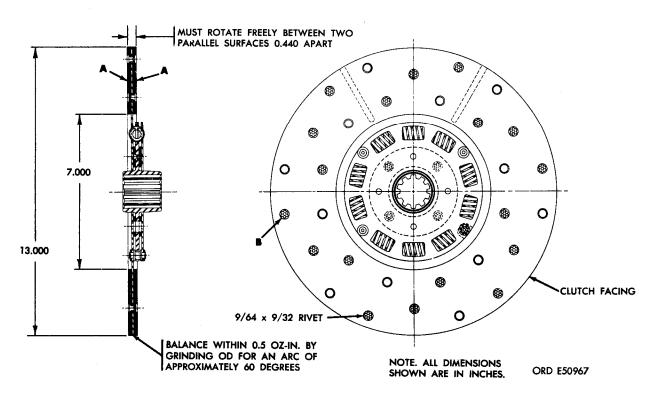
INSTALLING NEW CLUTCH FACINGS AND/OR CHECKING DRIVEN MEMBER RUNOUT.
